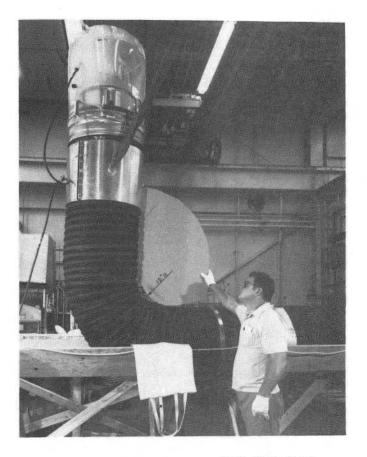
Cable Assembly in 90° Bend, Outer Jacket Removed
